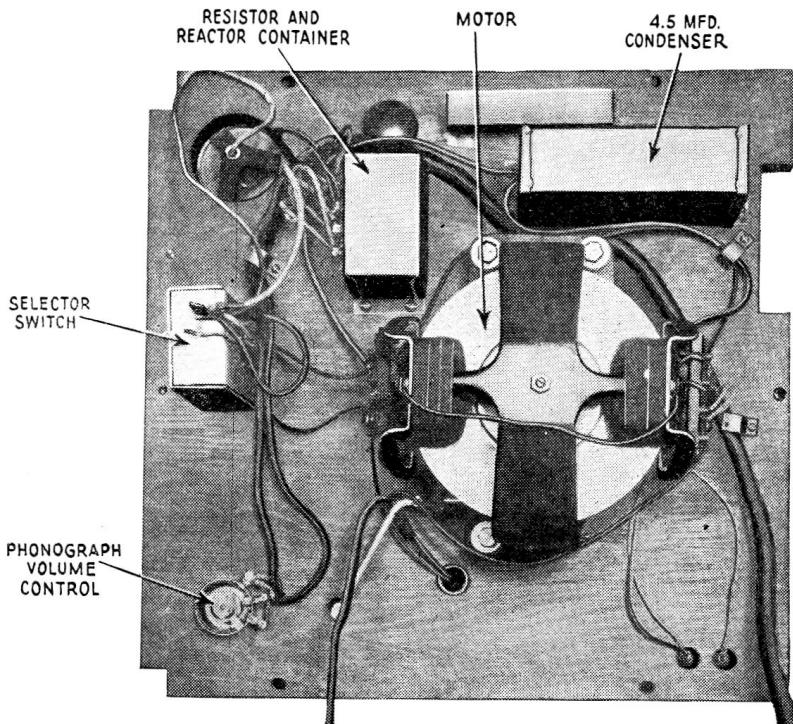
Bottom view of the phonograph motor mounting board, showing various parts.
